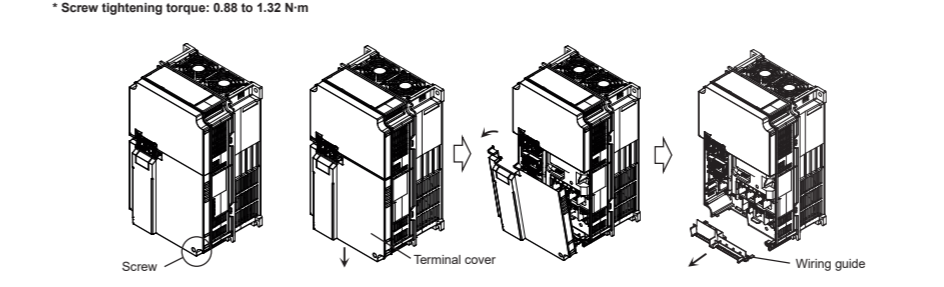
Front cover and wiring guide removal (FRN001LM3S-4G)
